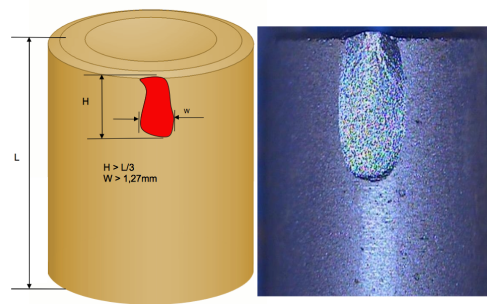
Drawing showing the allowed dimensions for chips and a damaged pellet.
